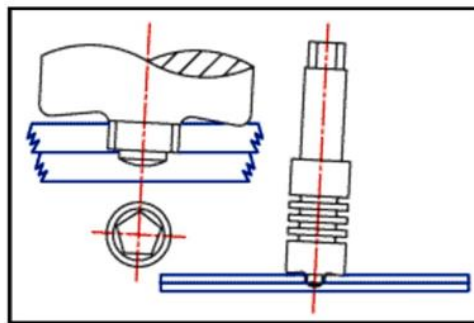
Schematic of the multi-stage tool for the FSW process [6]
